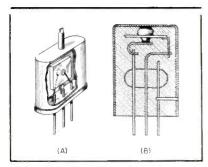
Assembly details of liquidcooled (A) and metallic-conduction cooled (B) power transistors
